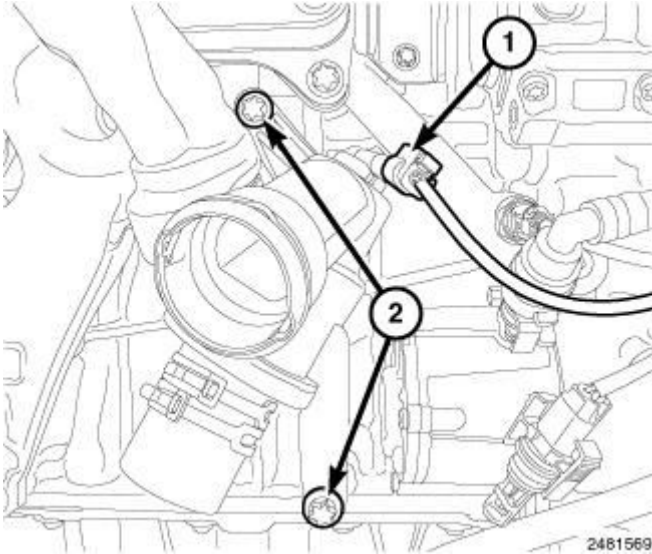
Identifying Thermostat Heater Connector & Upper Thermostat Housing Bolt
